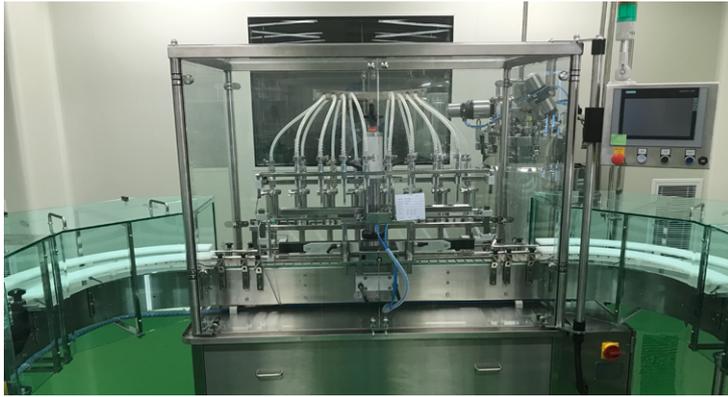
Solutions Production Line Equipment-liquid Filling Machine
